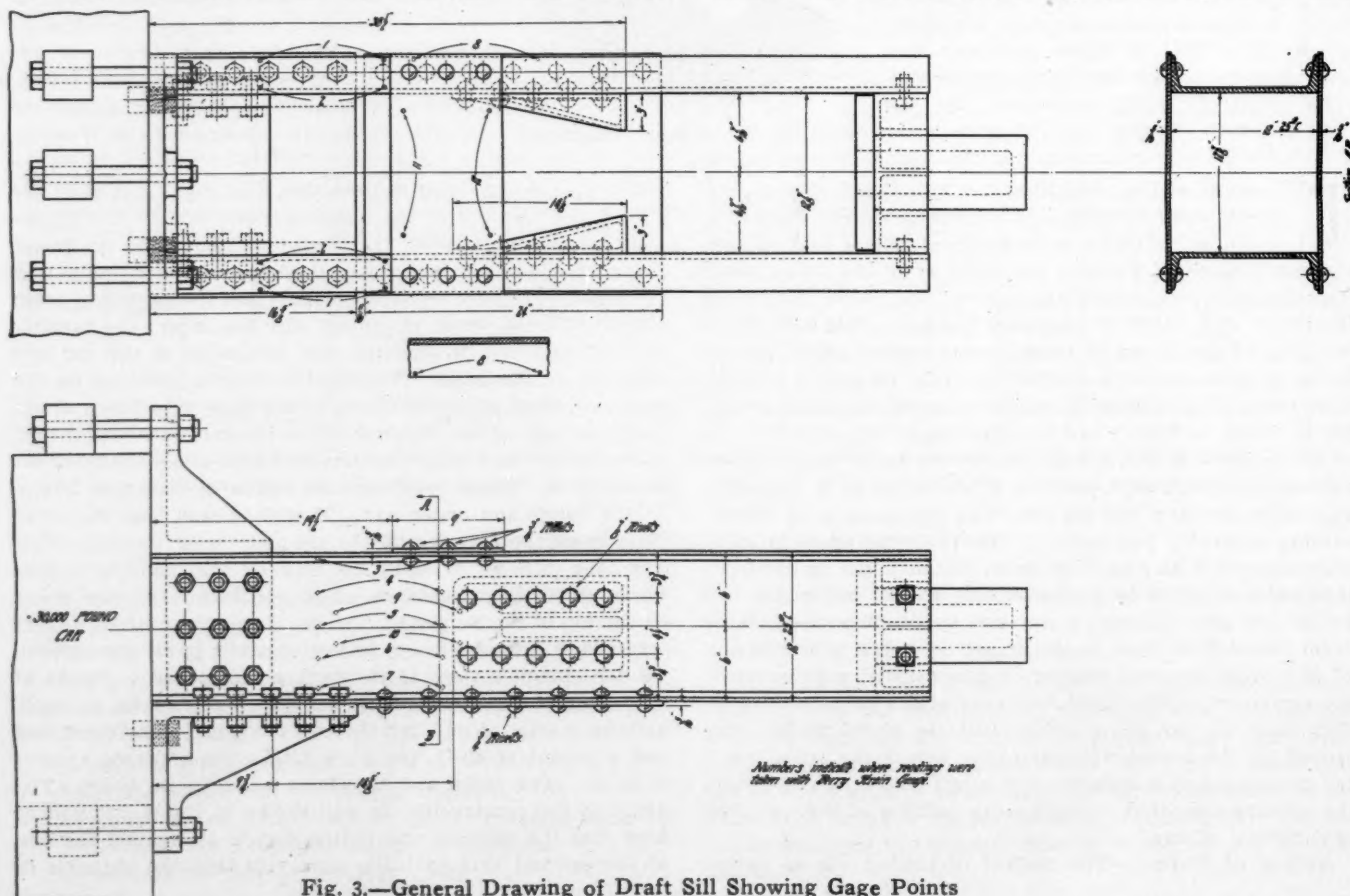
General Drawing of Draft Sill Showing Gauge Points
